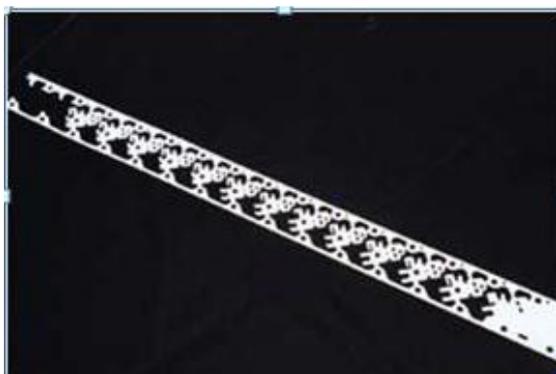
This part was rotated in the strip to maintain critical tolerances better .
